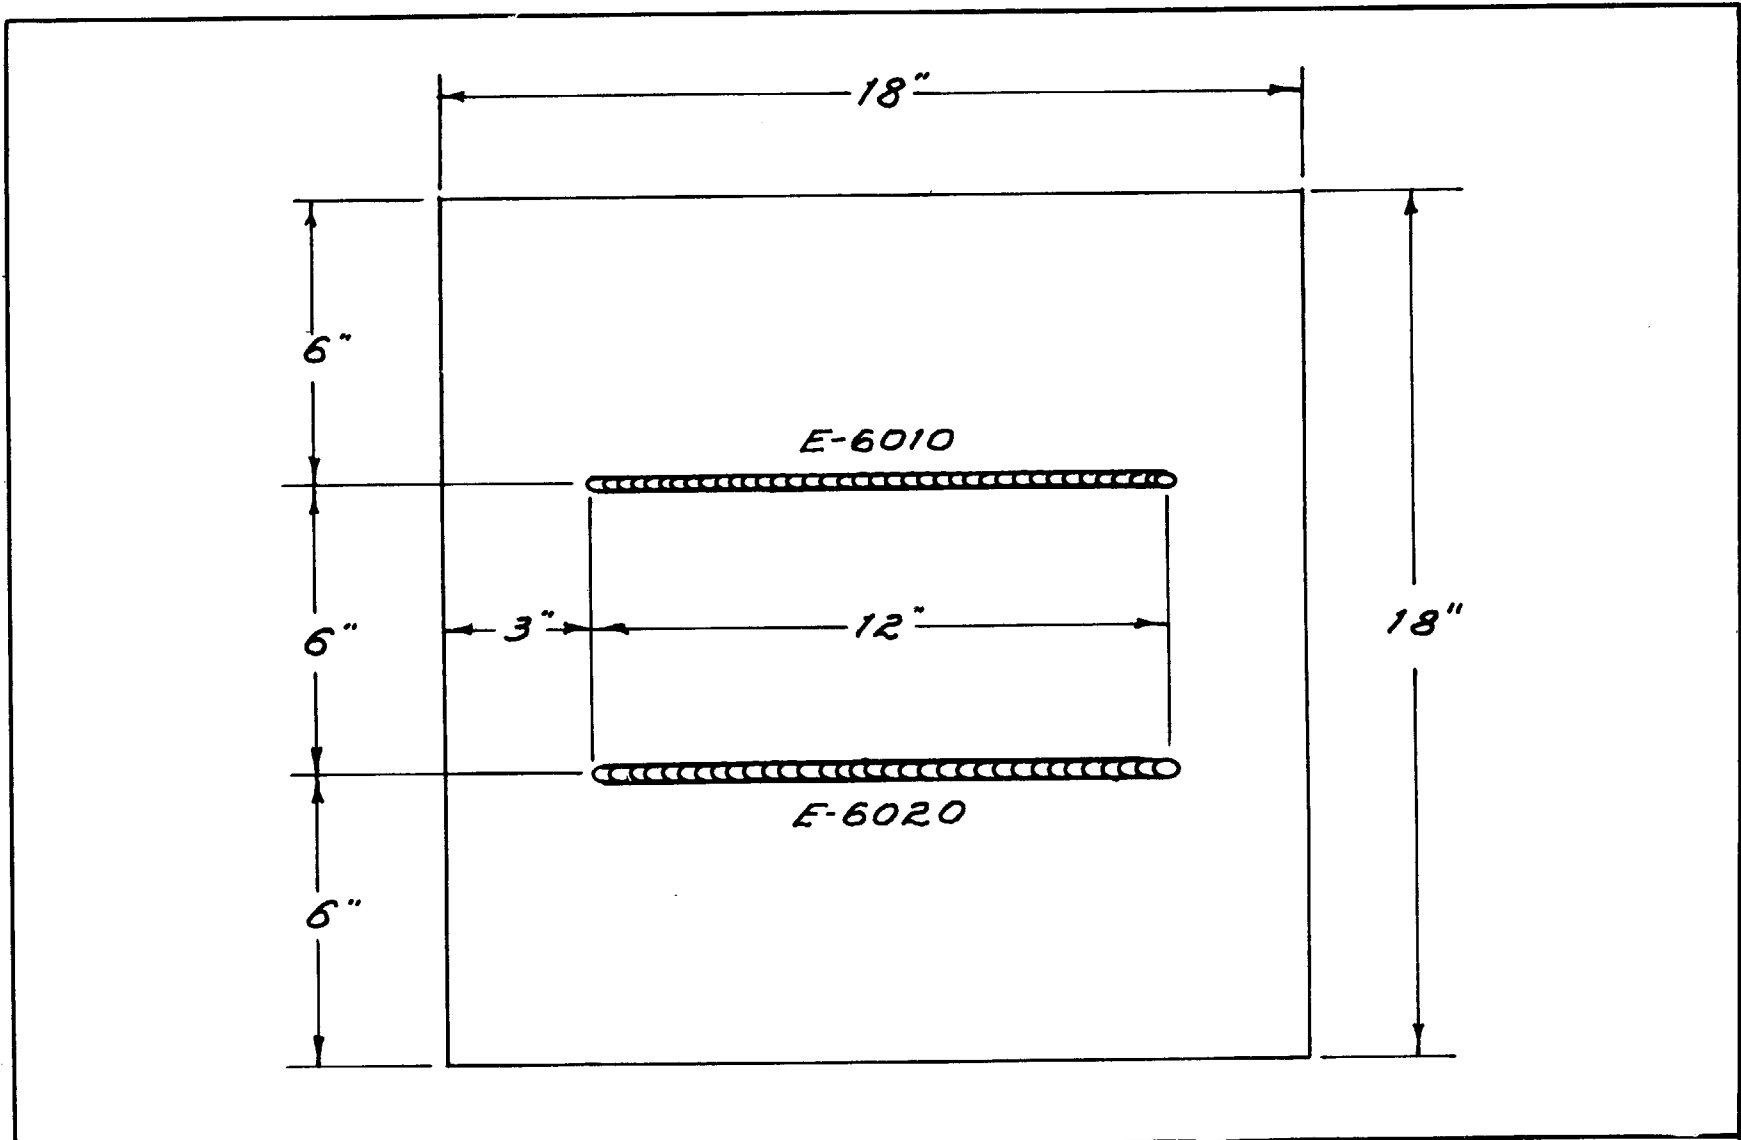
$\frac{3}{4}$ " PLATE SPECIMEN USED FOR DEPOSITION OF WELD BEADS
